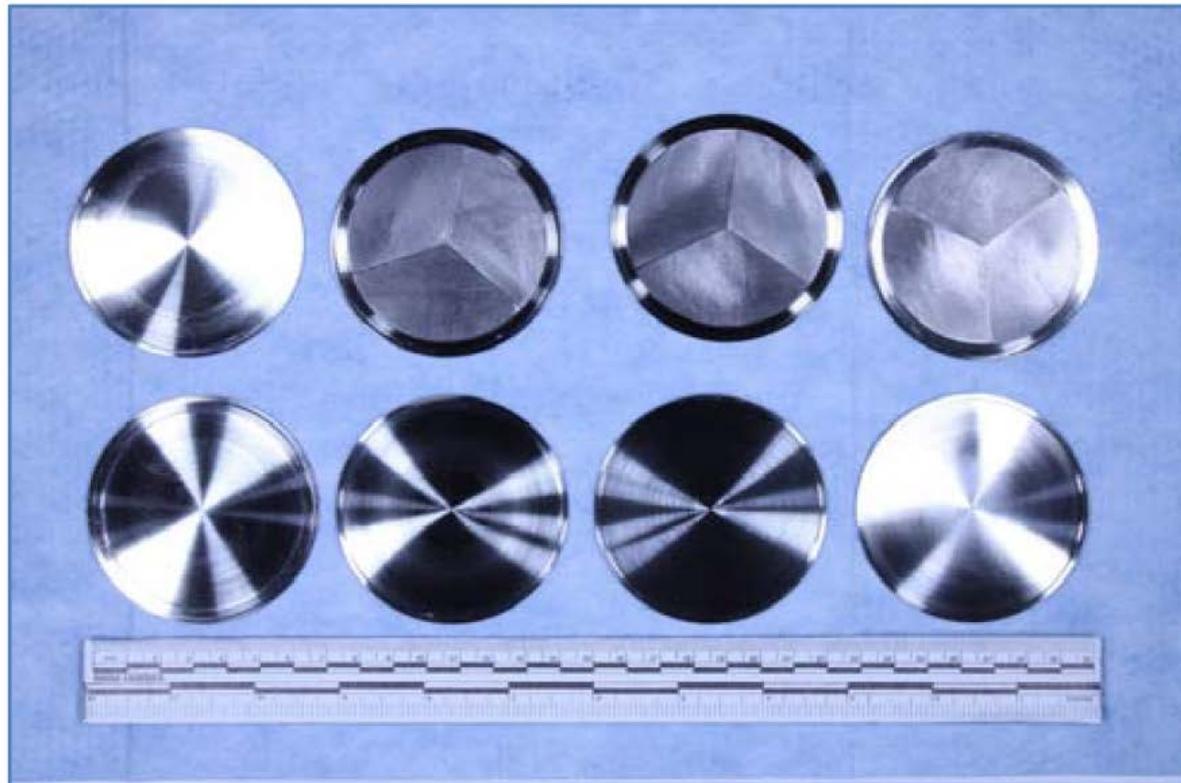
Machined components for BNL targets. From left to right, weld test specimen, three thorium target assemblies.
